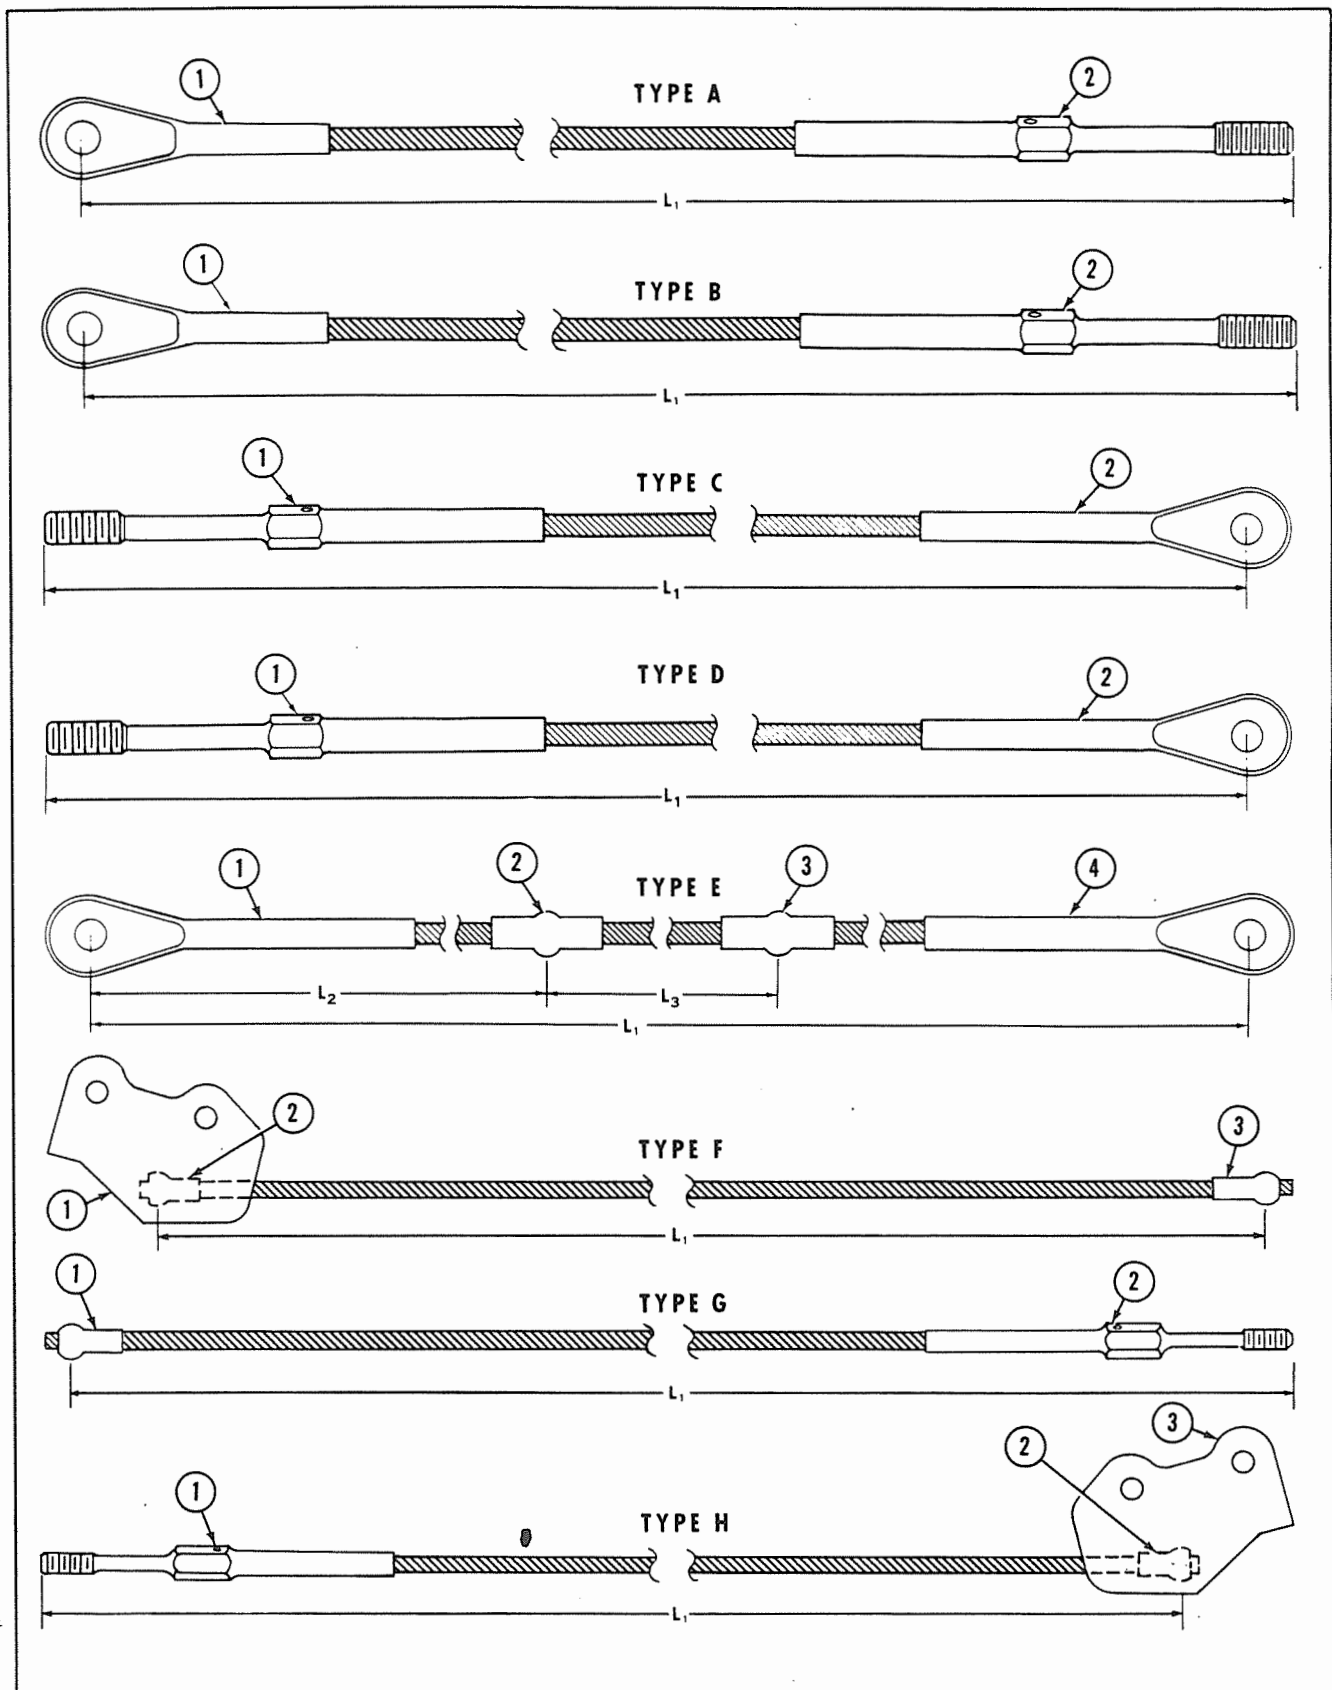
(Sheet 6 of 7 Sheets). Aileron and Aileron Geared Tab Control System – Cable Assemblies
